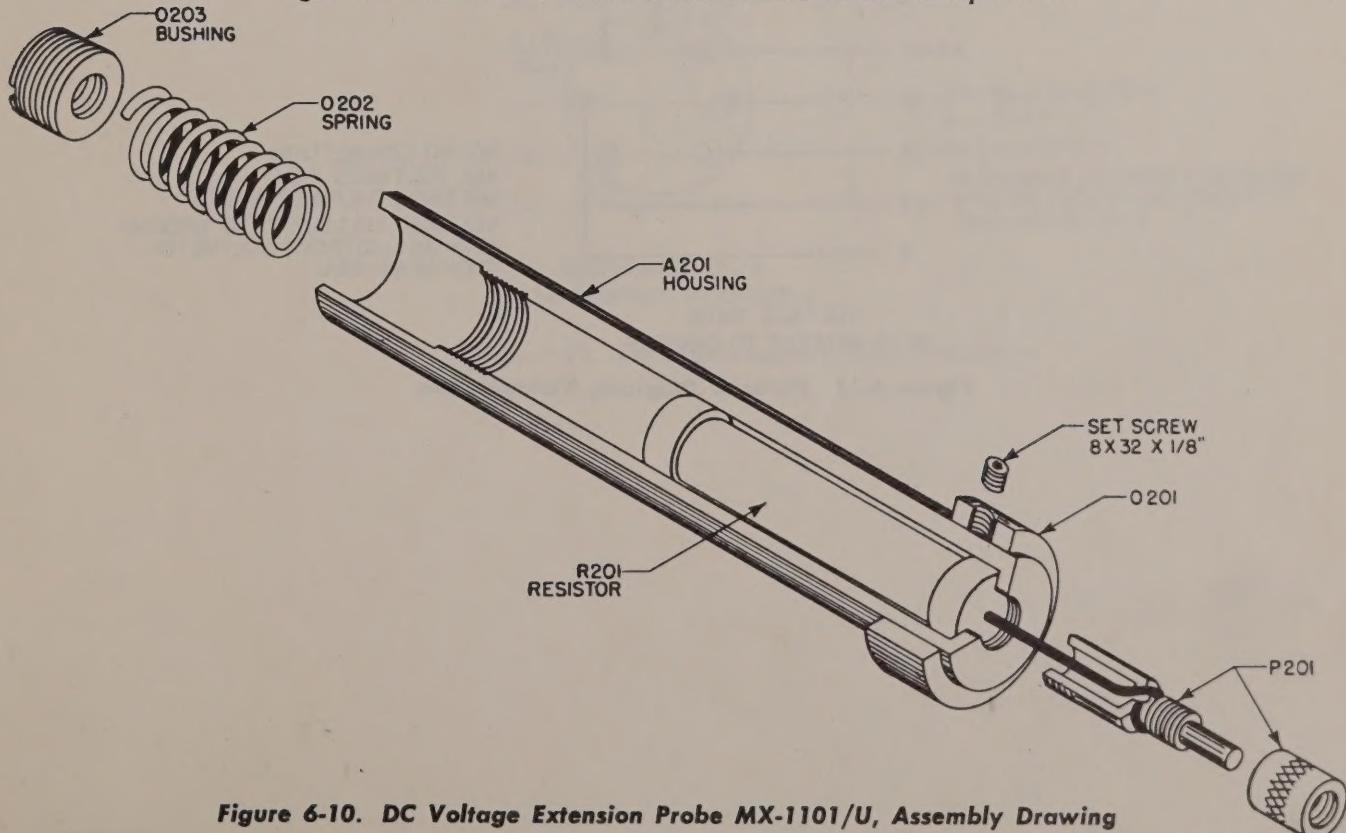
DC Voltage Extension Probe MX-1101/U, Assembly Drawing
